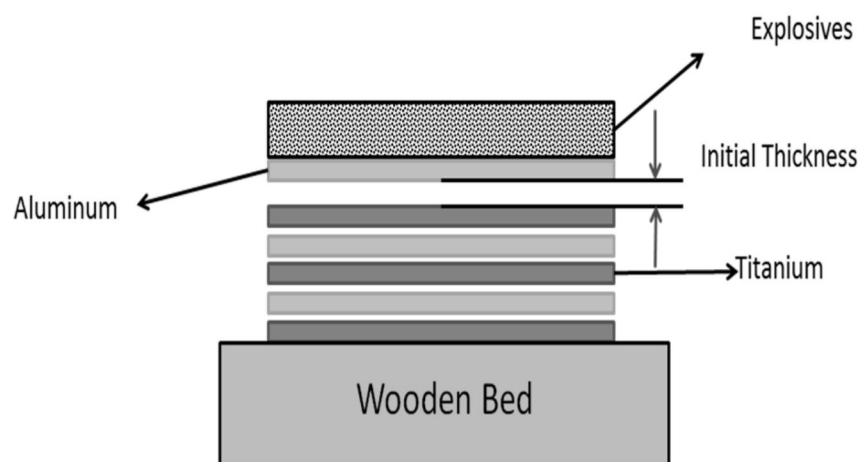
Schematic presentation of parallel setup used for Ti-Al multilayer explosive welding.
